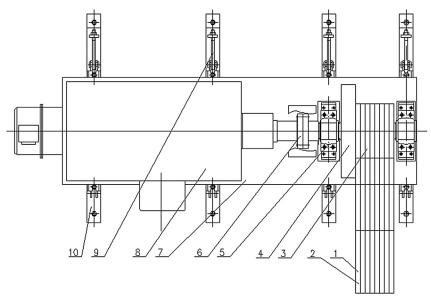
Diagram of the drive system. 1-main engine pulley, 2-narrow V-belt, 3-small pulley, 4-flywheel, 5-bearing support, 6-coupling, 7-motor base, 8-motor, 9-rail, 10-draw rod.
